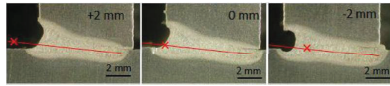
Cross sections of laser welds produced with focal point positions above, on top, and below the joint. $P_L = 4.56$ kW, $v_w = 1$ m/min.
